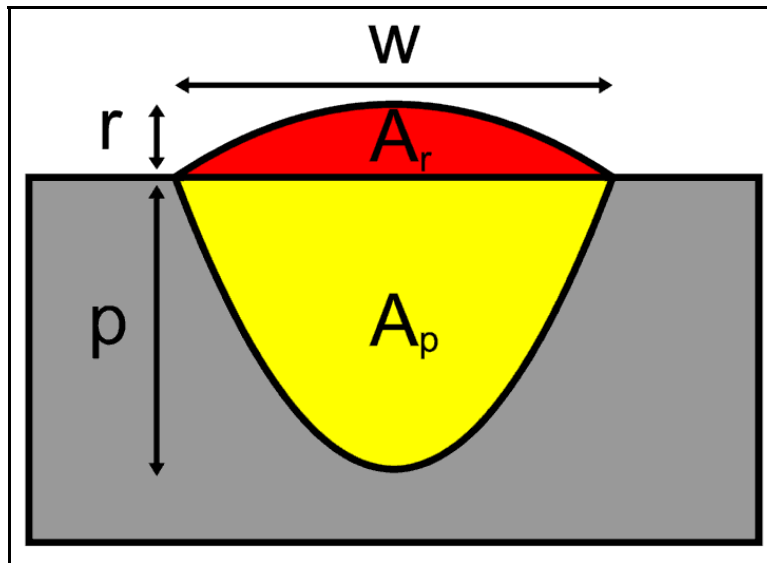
Bead-on-Plate Weld Metal Schematic
